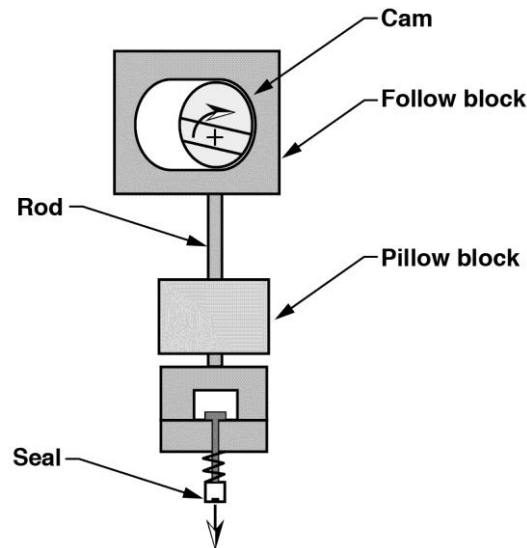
Seal Mechanism. Rotation of the cam about its off-center axis causes the follow block and rod to move downward as shown.
